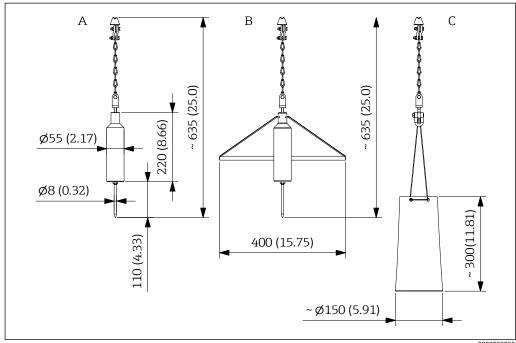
Dimensions of sensing weights - Standard (with umbrella) and medium bag. Unit of measurement mm (in)
